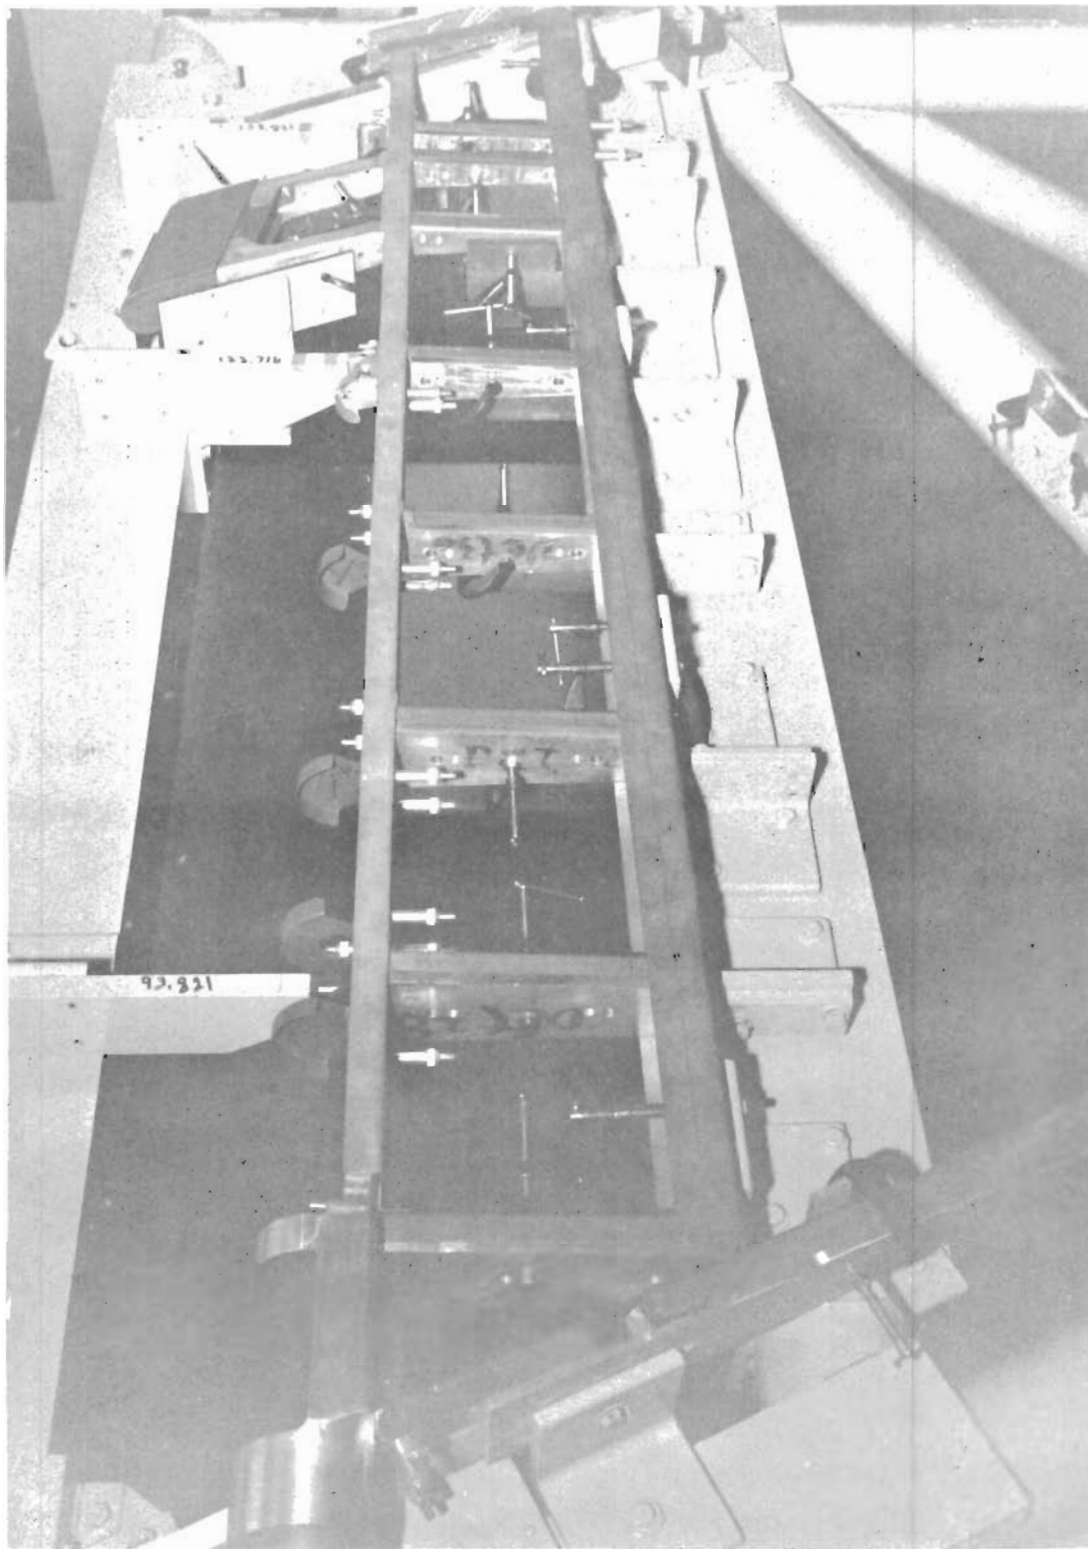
Pre-Fit Assembly of Beryllium Rudder in Assembly Fixture
